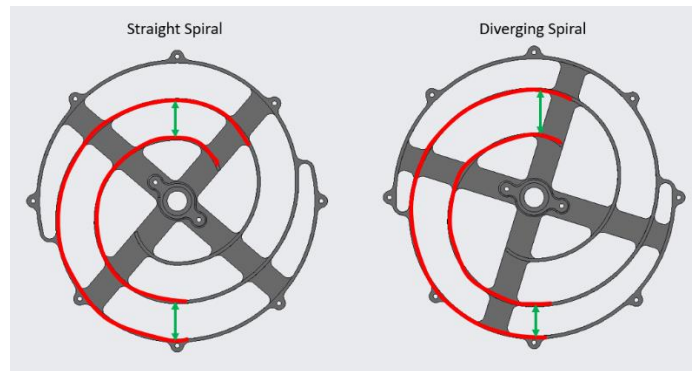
Bucket drum straight spiral & diverging spiral geometries.
